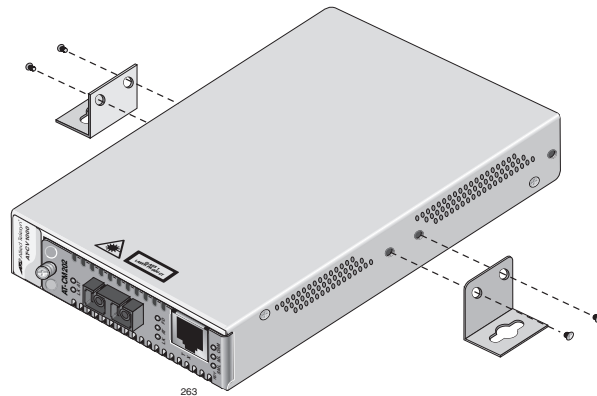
Installing the Wall-Mount Brackets on the Chassis
